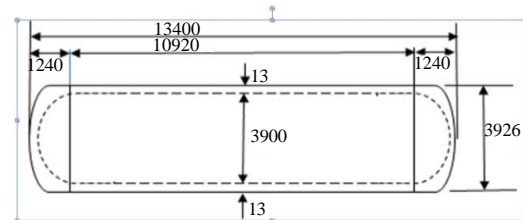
Schematic design of pressure vessel tank the dimensions are in mm
